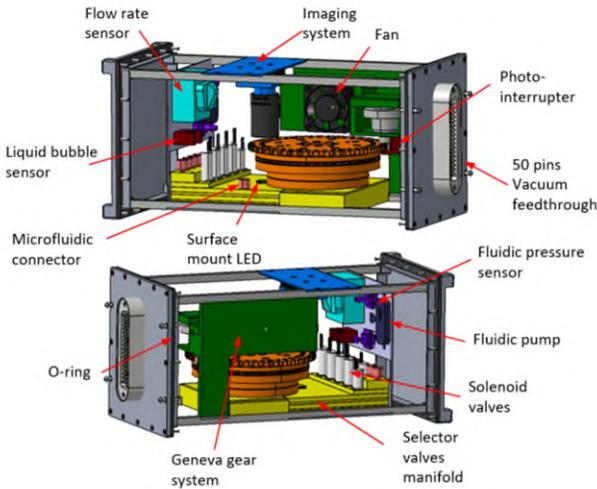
CAD images representing the BoB experiment payload with the pressure vessel covered and removed.
